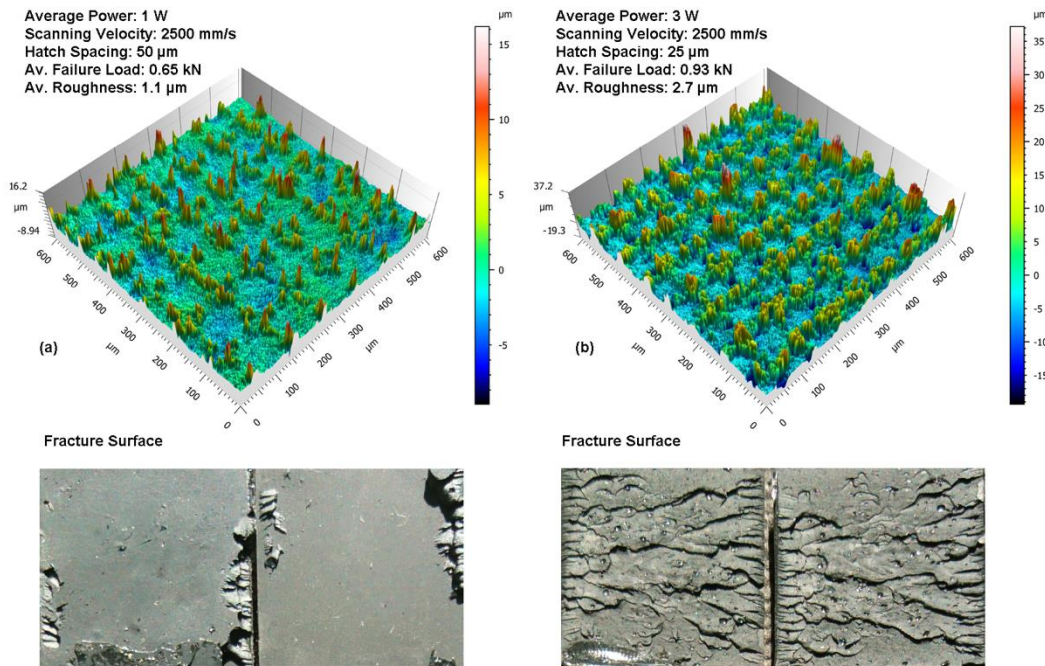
Measured topography of selected laser-treated surfaces and photographs of corresponding fracture surfaces for group 2, CL scanning strategy. Photographs show both 25 × 25 mm fracture surfaces for each individual test specimen.
